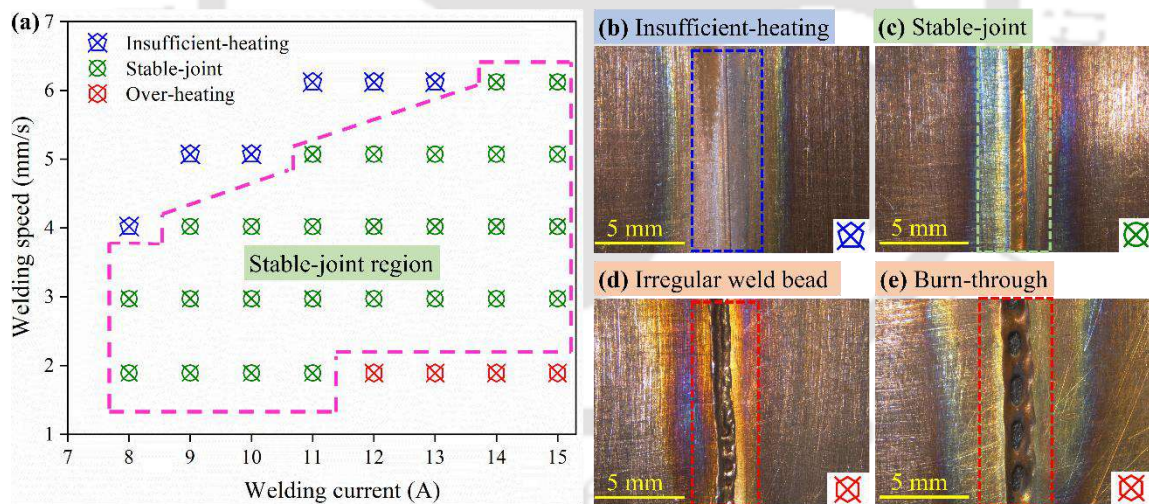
Illustrates (a) welding current and welding speed process window and weld appearance under different welding parameters, (b) insufficient-heating, (c) stable-joint, and (d-e) over-heating.
